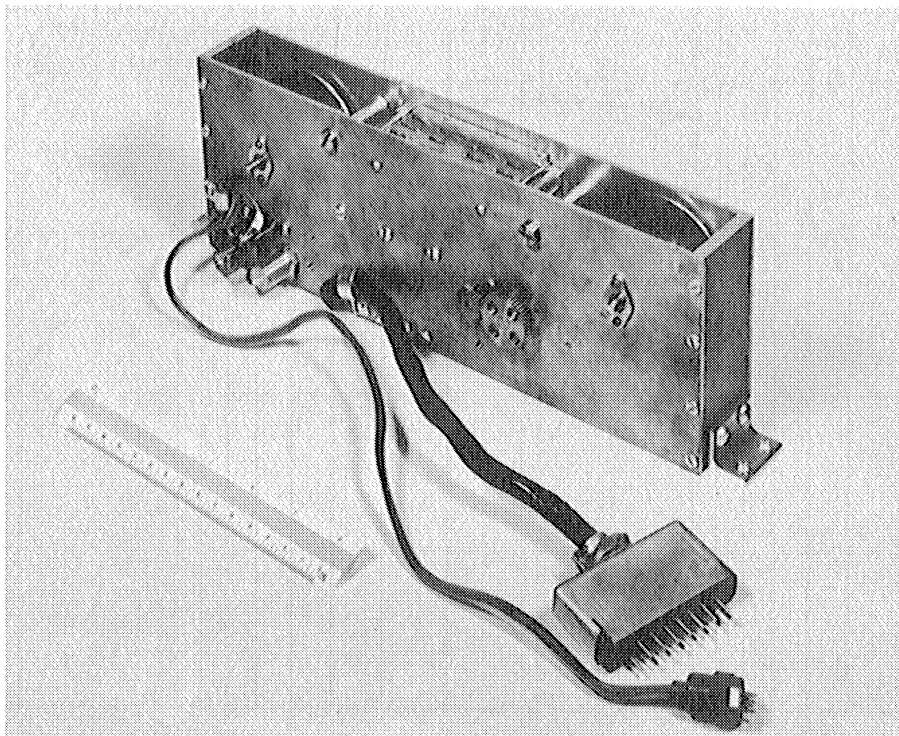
Magnetic Recorder Assembly, Probe Aerobee
